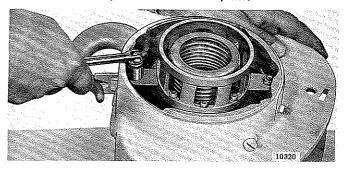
Removing Self-locking Nuts Securing Spring Plunger to Brake Plate Pins
